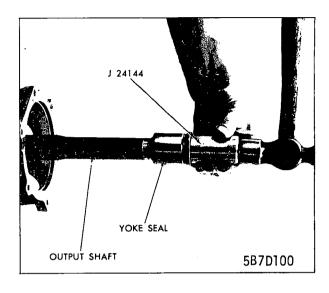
D-233 - Installing Slip Yoke Seal (THM 375)
